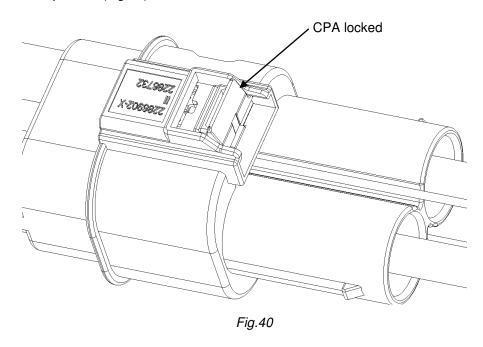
SOCKET HOUSING AND TAB HOUSING ASSEMBLED; CPA IN LOCKED POSITION
